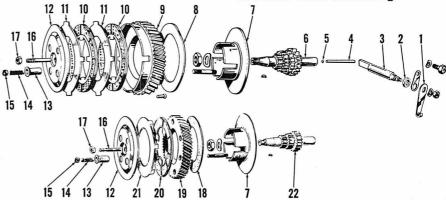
Exploded view of clutch assembly. The clutch assembly at top is used with four speed transmissions. The clutch shown at bottom is used with three speed transmissions.
